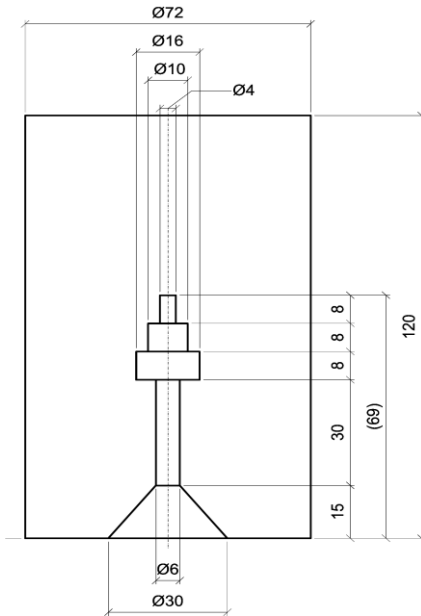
The casting tree, the dimensions of the pattern and the dimensions of the mould.
